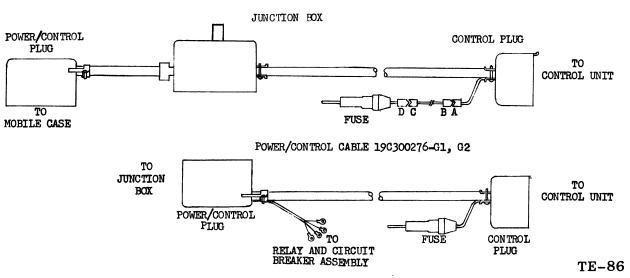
CABLE DIAGRAM REAR SEAT EXTENSION CABLES
